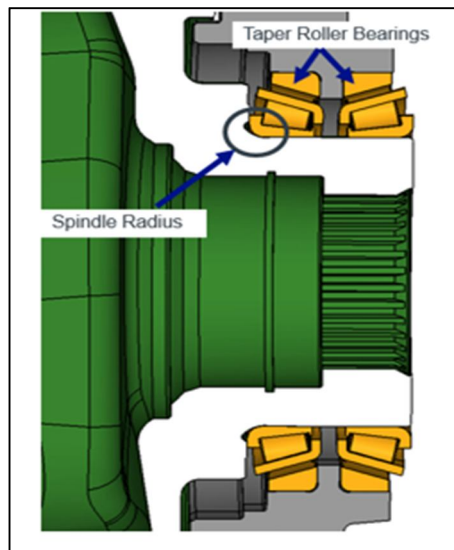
Steering knuckle with tapered roller bearings (schematic)
